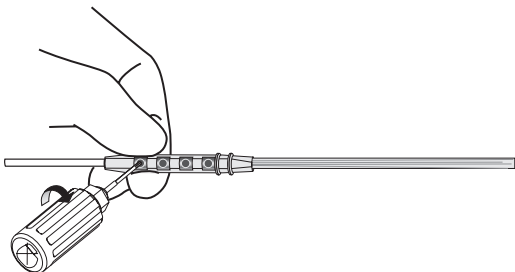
Tighten the setscrews holding the extension firmly on the sides of each connector block.
